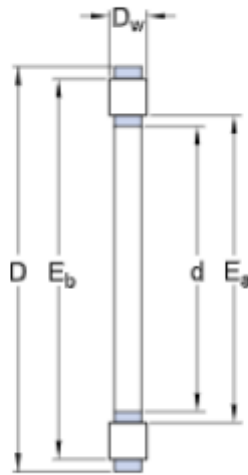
Cylindrical roller bearing schematic diagram (SKF Bearings n.d)
